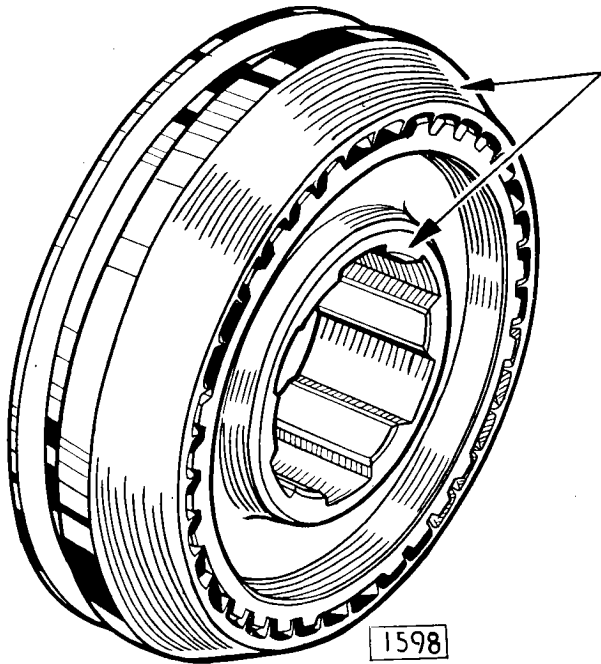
The wide chamfer end of the operating sleeve must be fitted to the same side as the large boss on the synchro sleeve.
